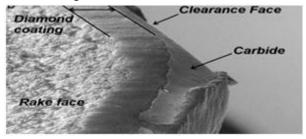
Diamond coating wear of 22691 Diager tool after 309 drillings. [3]
